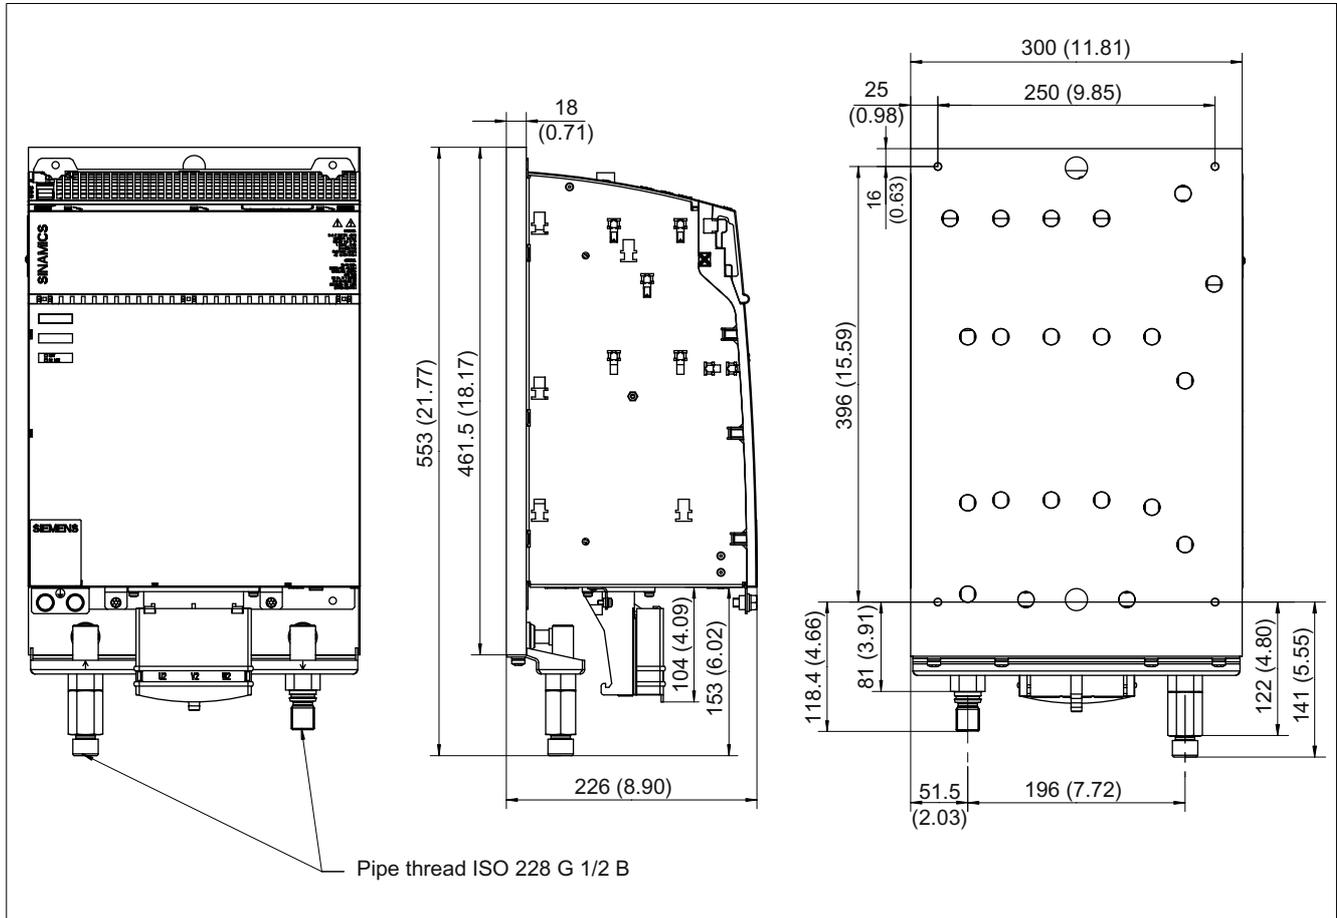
Dimension drawing of Motor Module Liquid Cooled (200 A), all dimensions in mm and (inches)
